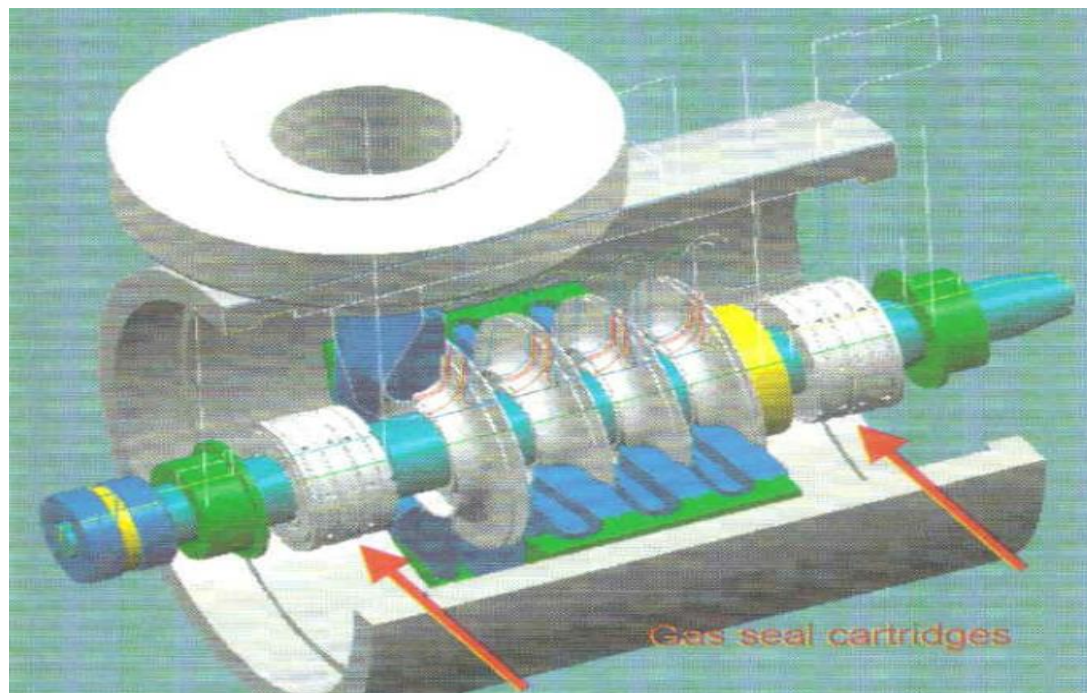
B. Location of shaft seals in the compressor [Ref.62]
